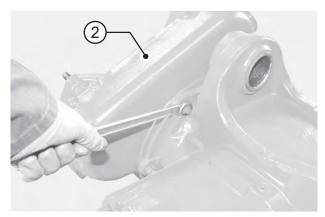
DIRECTLY FLANGED VERSION ONLY Remove screws attaching the reduction unit (2).
